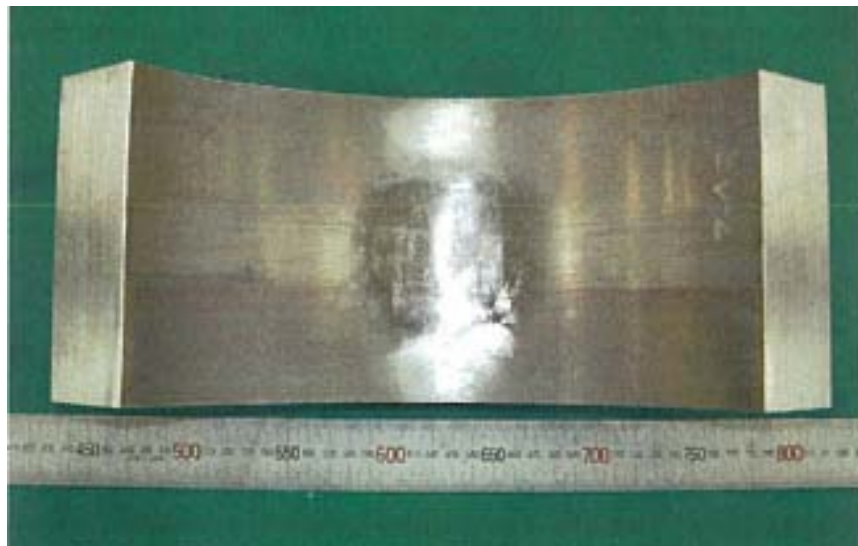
PINC Block 2.5 from JNES – PZR Surge Line to Safe-End Dissimilar Metal Weld
